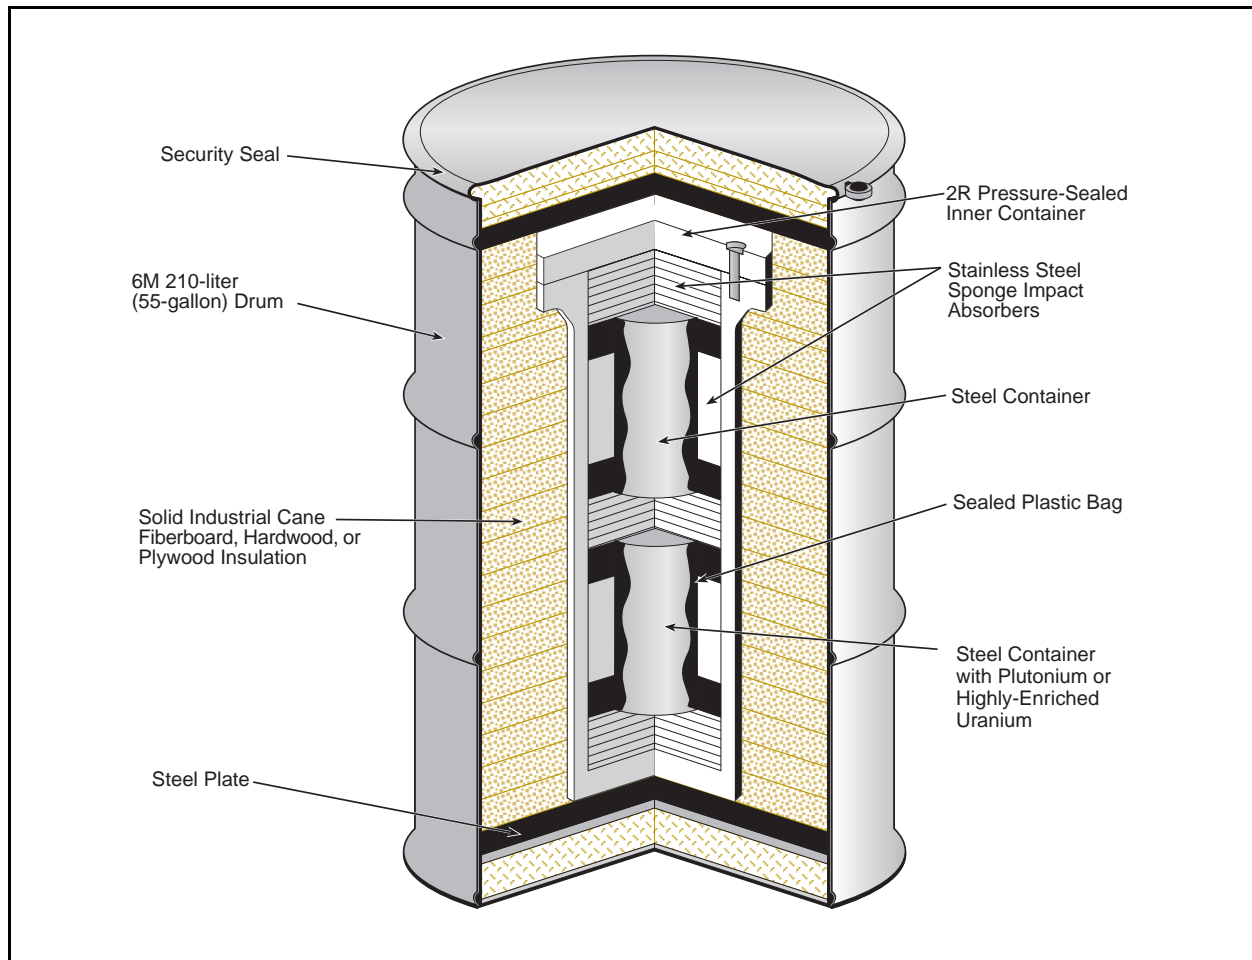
Typical Assembly of 6M, Type B Packaging for Plutonium
